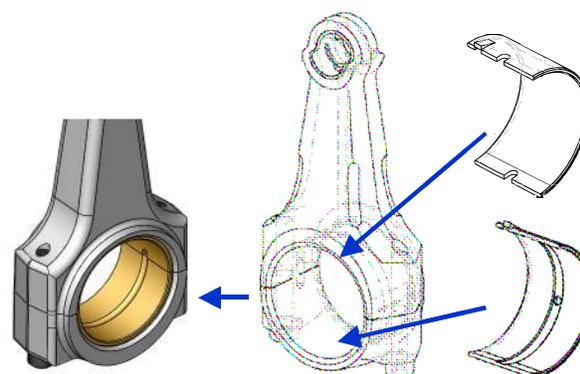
Depiction of change in connecting rod crank bearing design to one having no oil groove in the upper half bearing shell.
